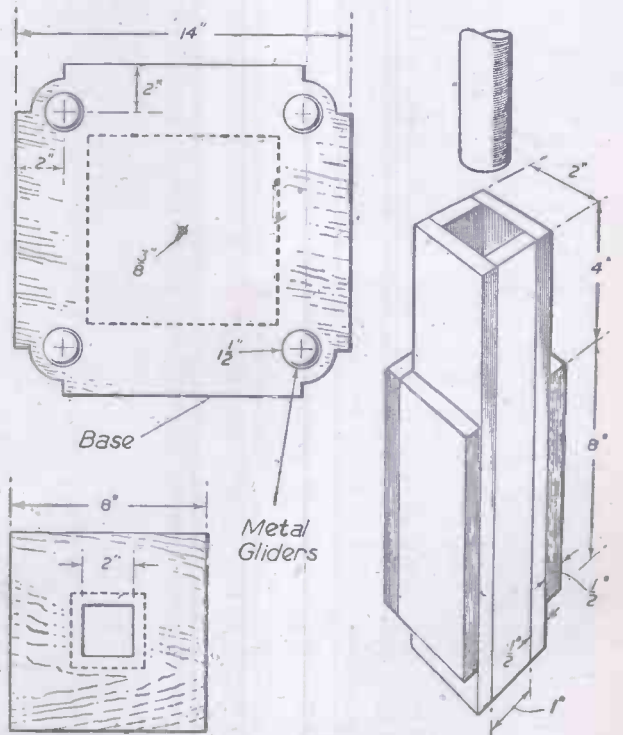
Underside view of base, collar piece, with constructional view of shouldering to the brass tubular column.
